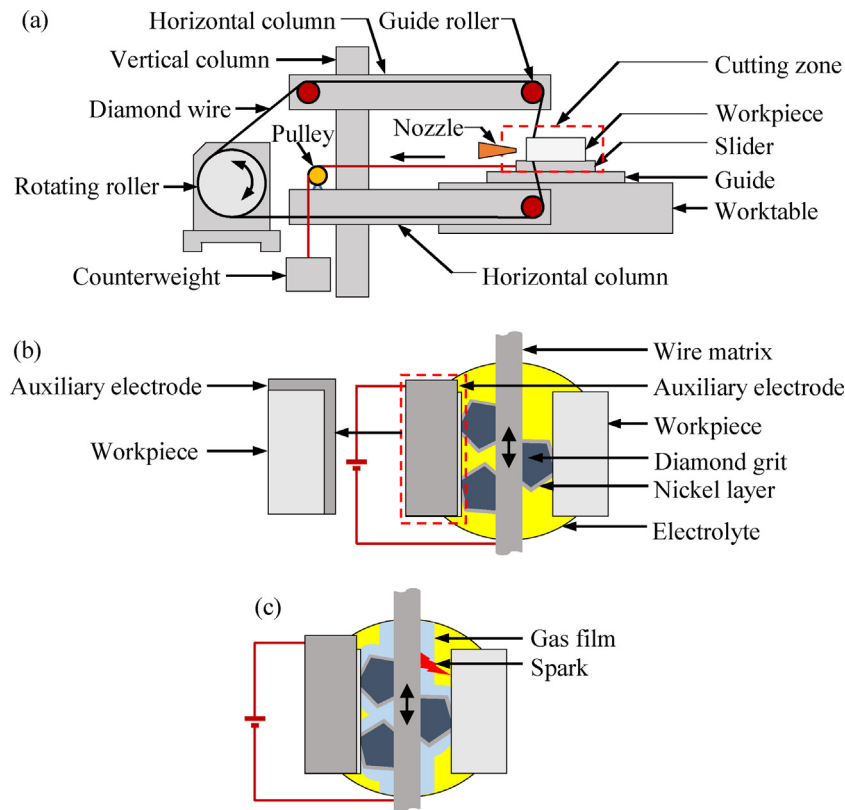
Experimental setup and principle of the electrochemical discharge assisted diamond wire sawing: (a) cutting setup, (b) enlarged view of cutting zone without applying voltage, and (c) enlarged view of the cutting zone with applying voltage.
